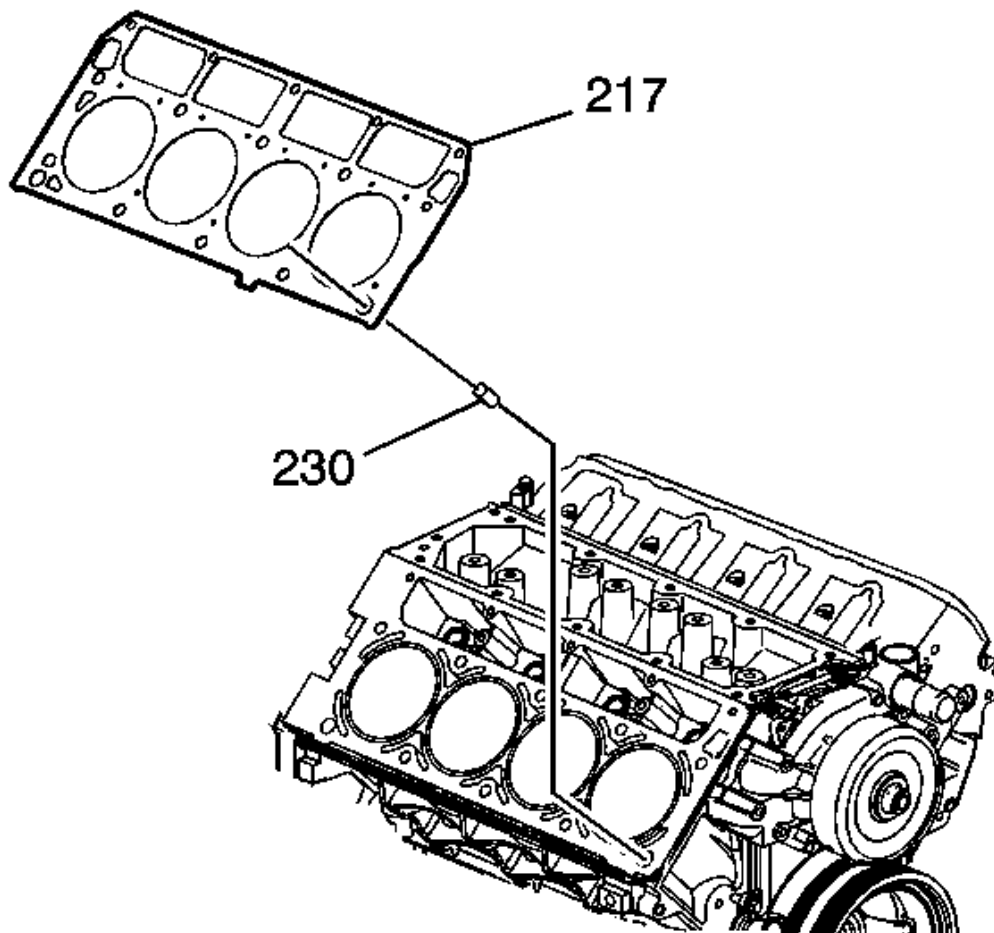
Removing/Installing Right Cylinder Head Gasket
